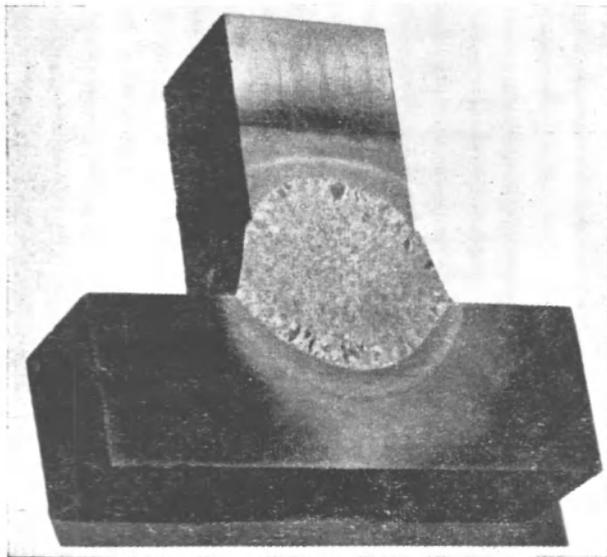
A Tee-Butt weld between 3 in. thick plates made with two consumable guides.
